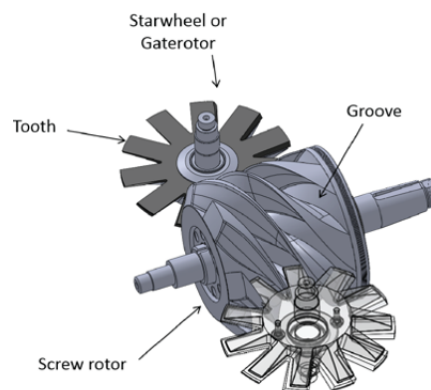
Assembly of a single-screw compressor or expander machine.
